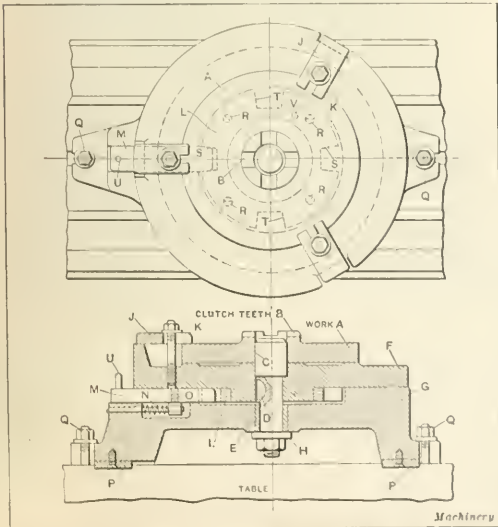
Indexing Fixture used for milling Teeth in Clutch Gear
